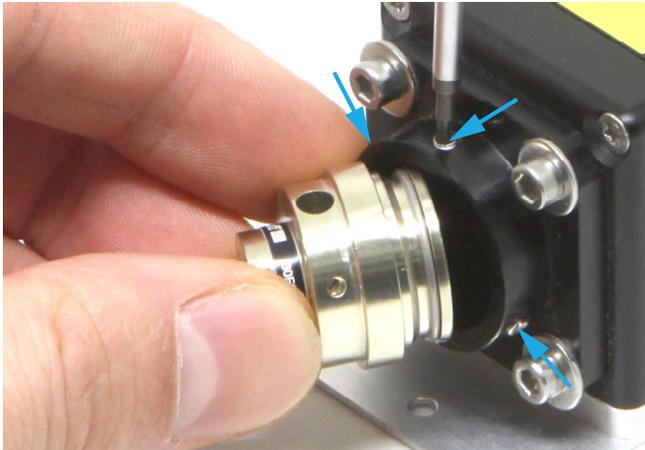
left: Attach the laser beam coupler to the adapter flange with three radially arranged pin screws.
